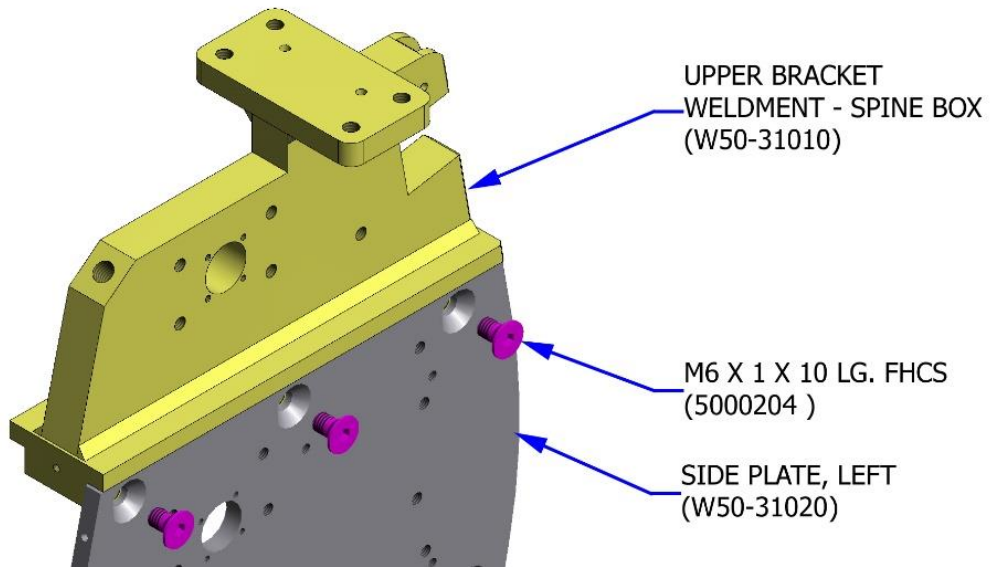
Separating the upper spine box bracket weldment from the left side plate.
